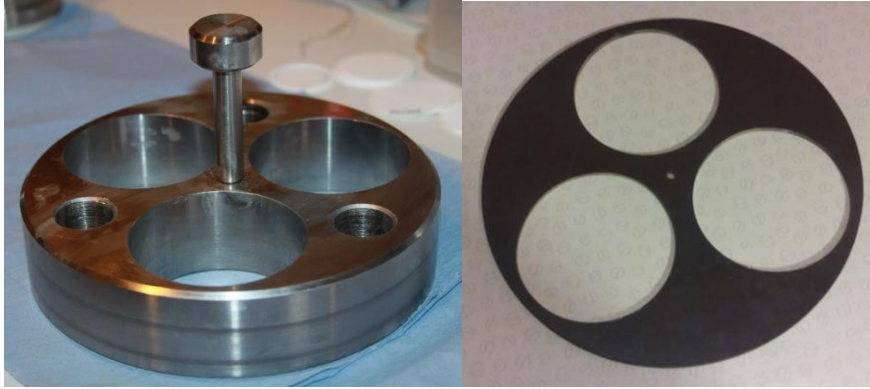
SS's fixtures holders used for bottom (left) and top (right) surface lapping.
